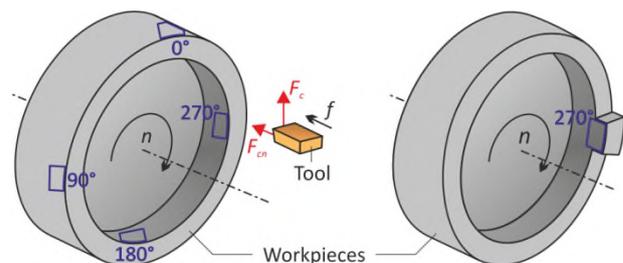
Experimental setup for continuous (annular workpiece, left) and discontinuous (tooth-like workpiece, right) turning with labeling of sampling points
